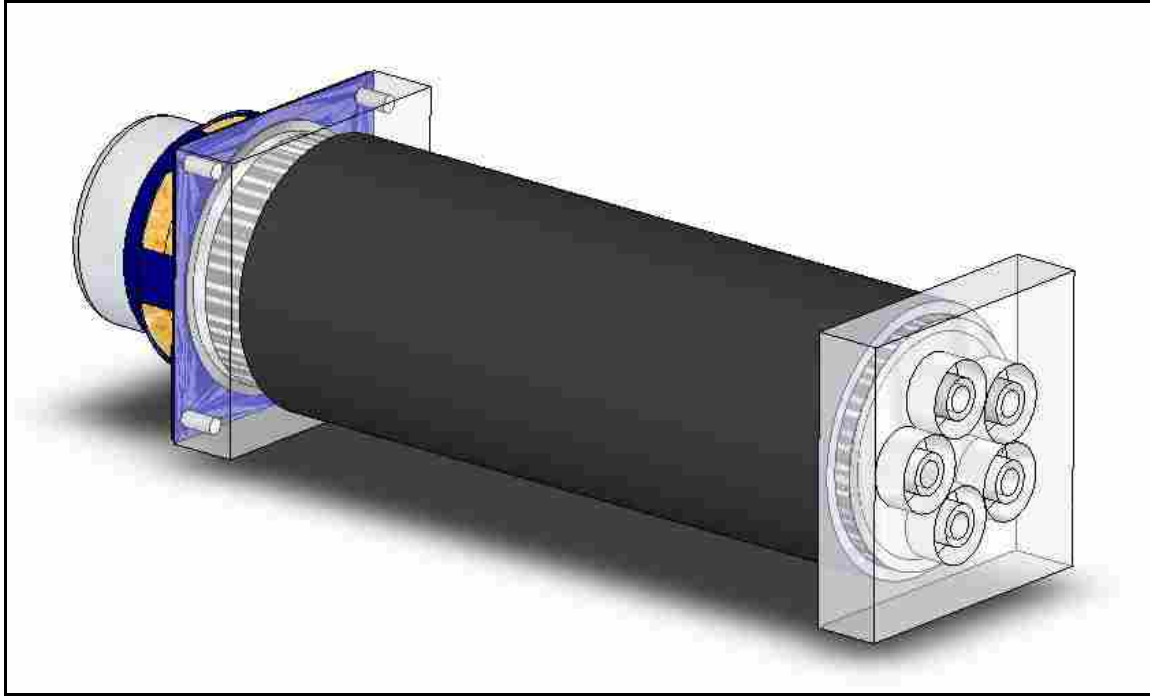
CAD assembly drawing of the splitter mounted on the driver tube opposite the driver and coupler
